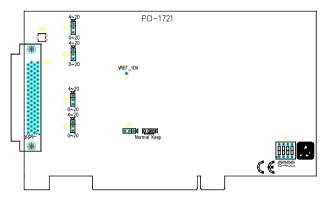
Card connector, jumper and switch locations Table 2-1: Summary of jumper settings
